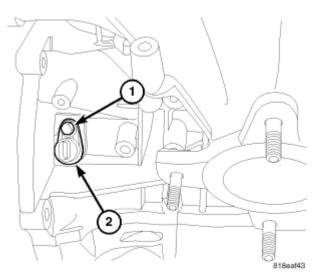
CRANKSHAFT POSITION SENSOR Courtesy of CHRYSLER LLC
